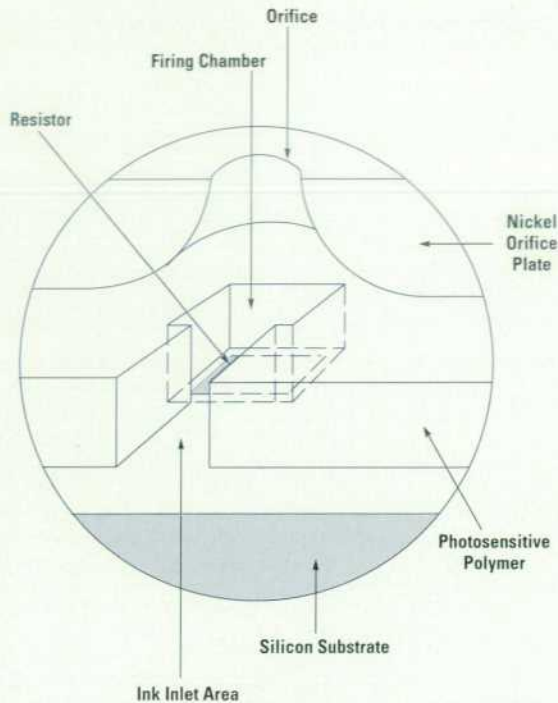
An exploded cross-sectional view of a single inkjet nozzle.
